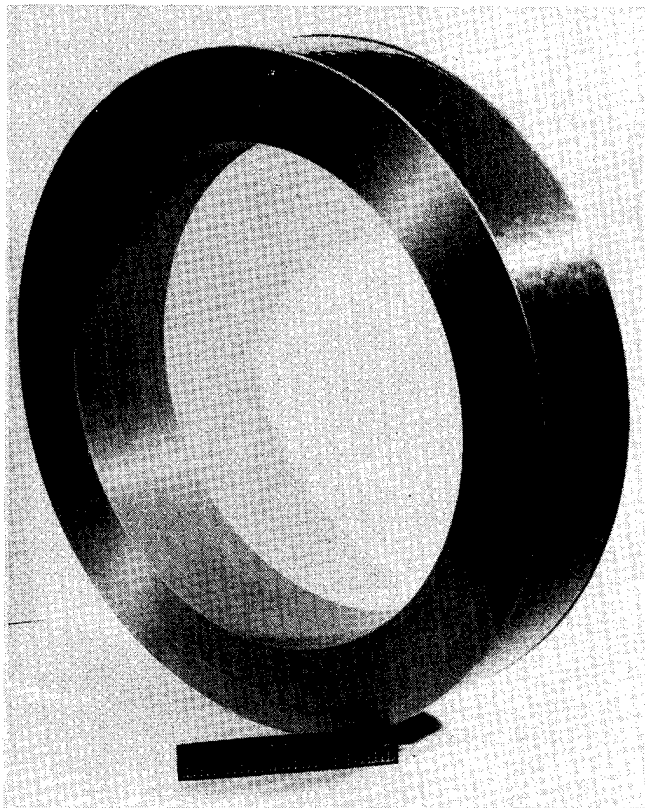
WINDING SETUP FOR FABRICATING THE FULL SCALE RIMS
